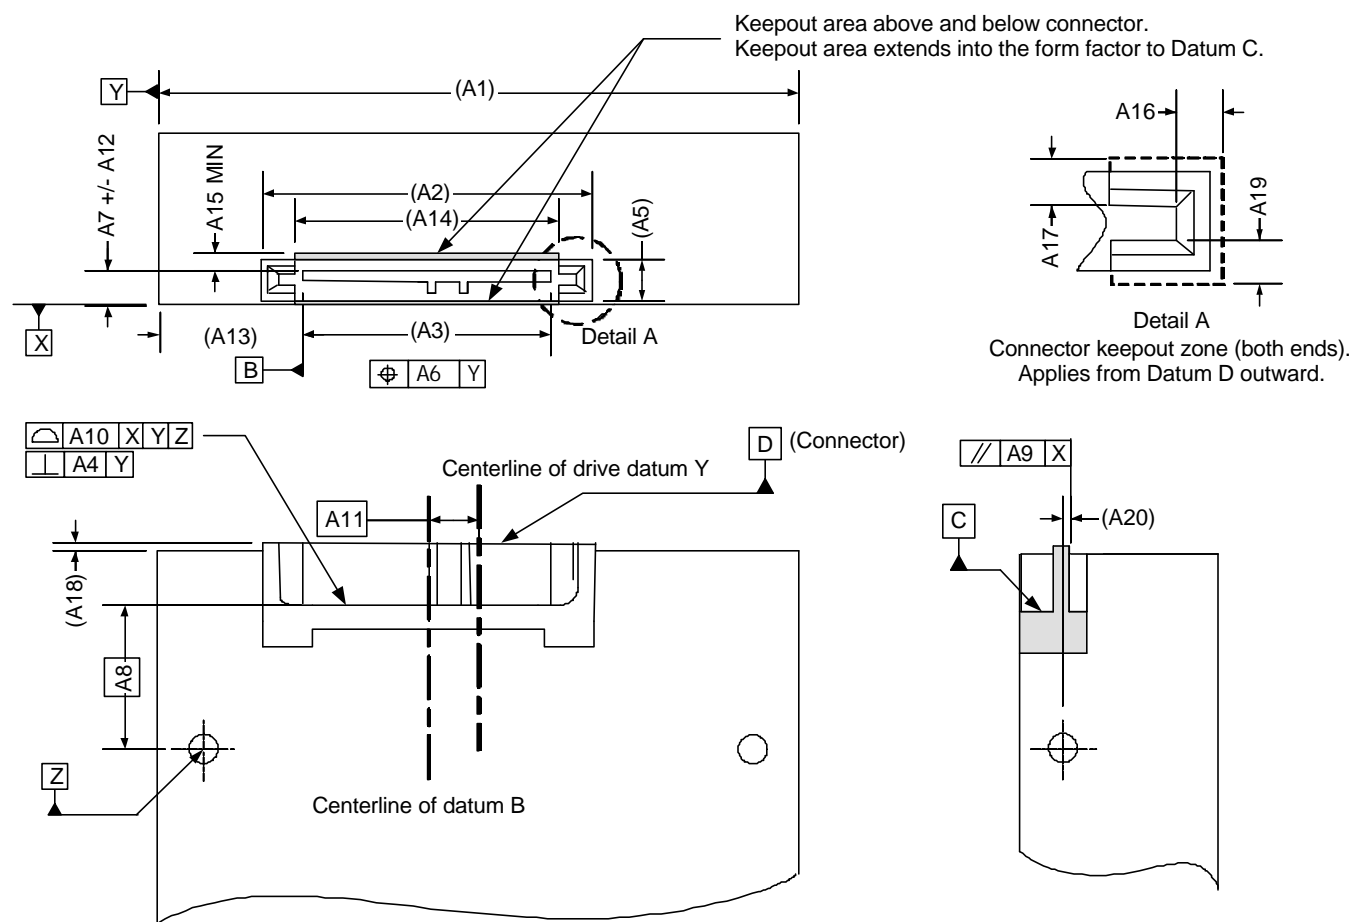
(OPTION 1) Serial Connector Referenced To Bottom Mounting Screw On 63.5 mm (2.5") Disk Drive
